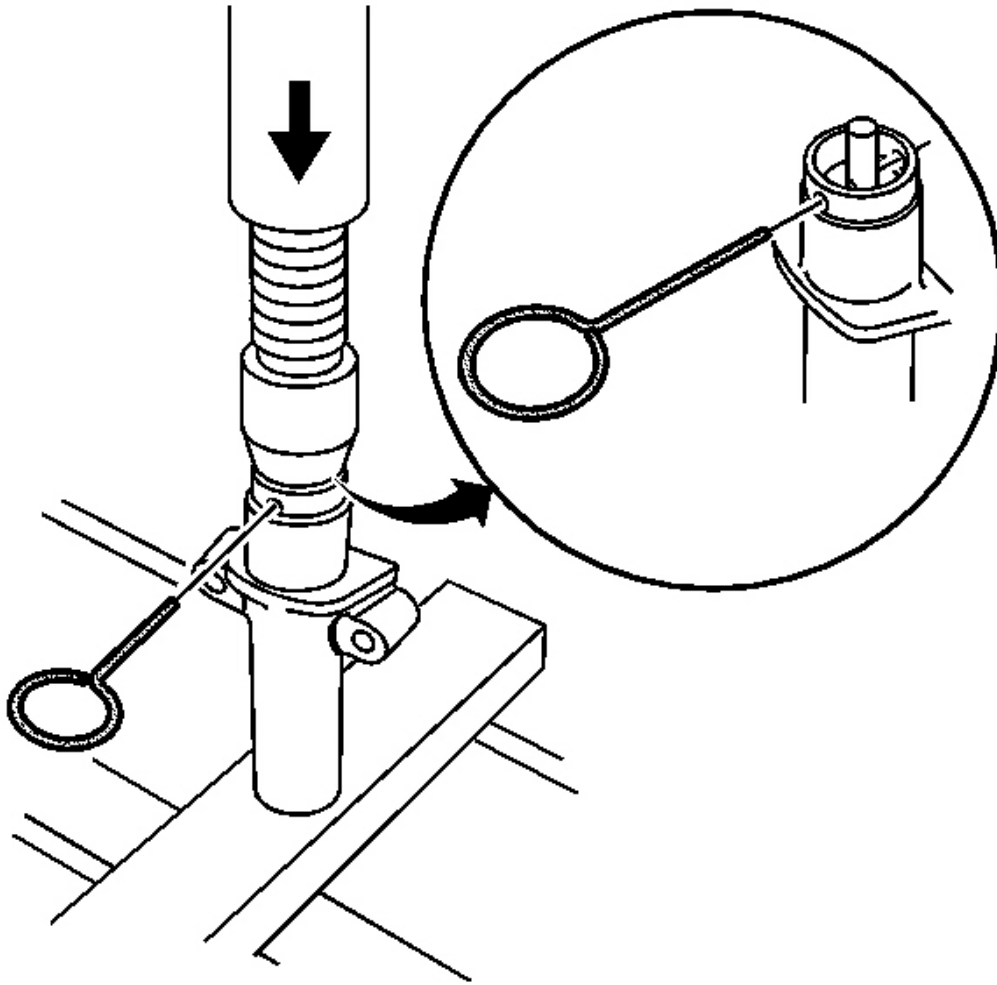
View Of Hydraulic Press To Compress The Tensioner
